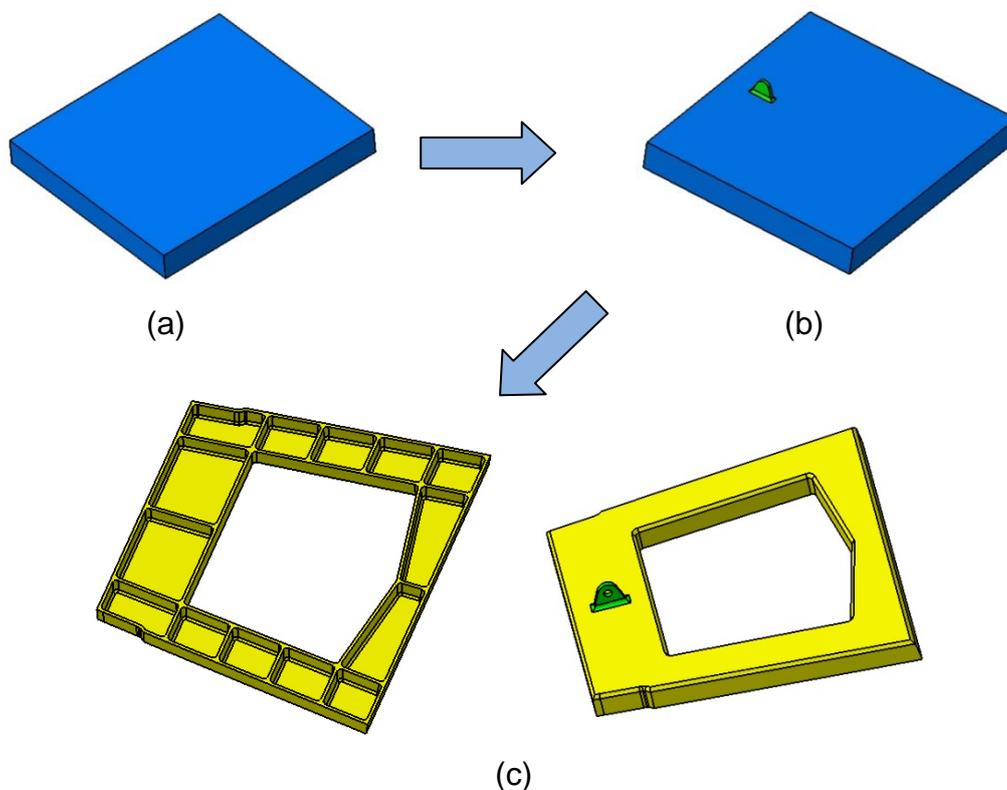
The schematic of proposed hybrid design 1: (a) substrate; (b) lug added by WAAM; (c) final part by machining
